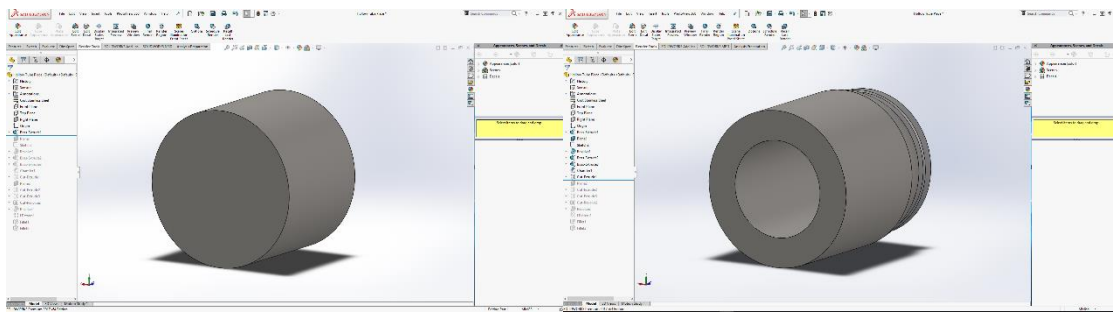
SMSNS-16: CAD Drawing (Stages 1 & 2)
